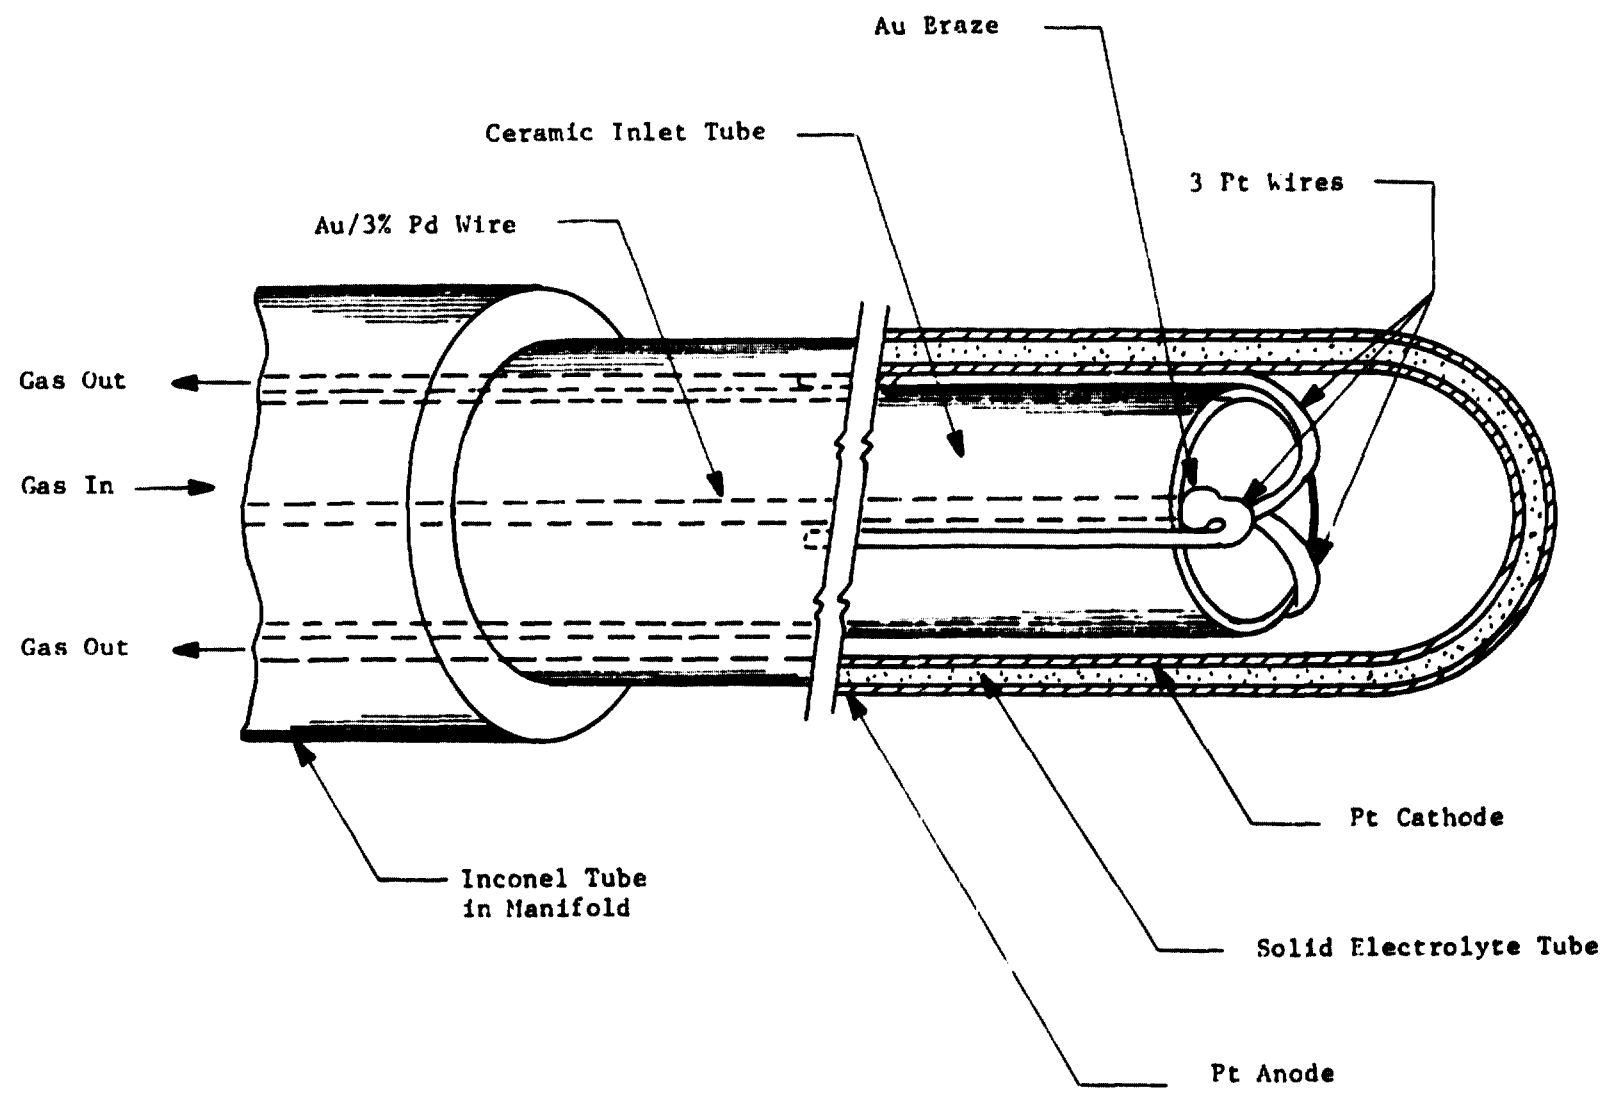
CERAMIC INLET TUBE SUBASSEMBLY AS POSITIONED IN ELECTROLYTE TUBE
